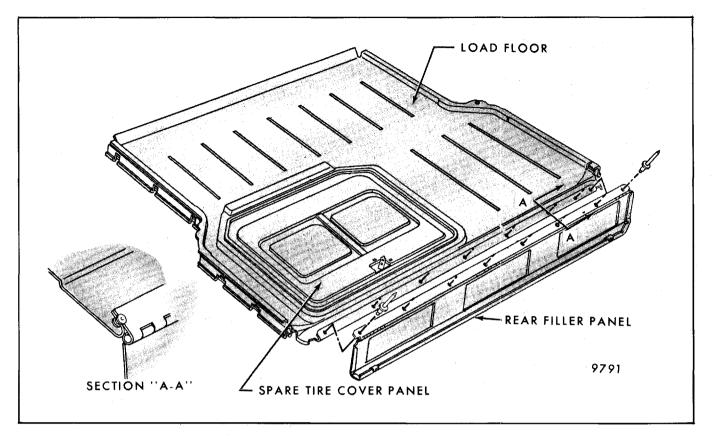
Luggage Compartment Rear Filler Panel Installation - A Styles
